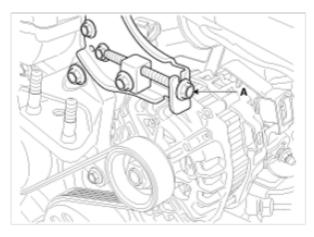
Identifying Alternator Tension Adjust Bolt Courtesy of HYUNDAI MOTOR AMERICA
